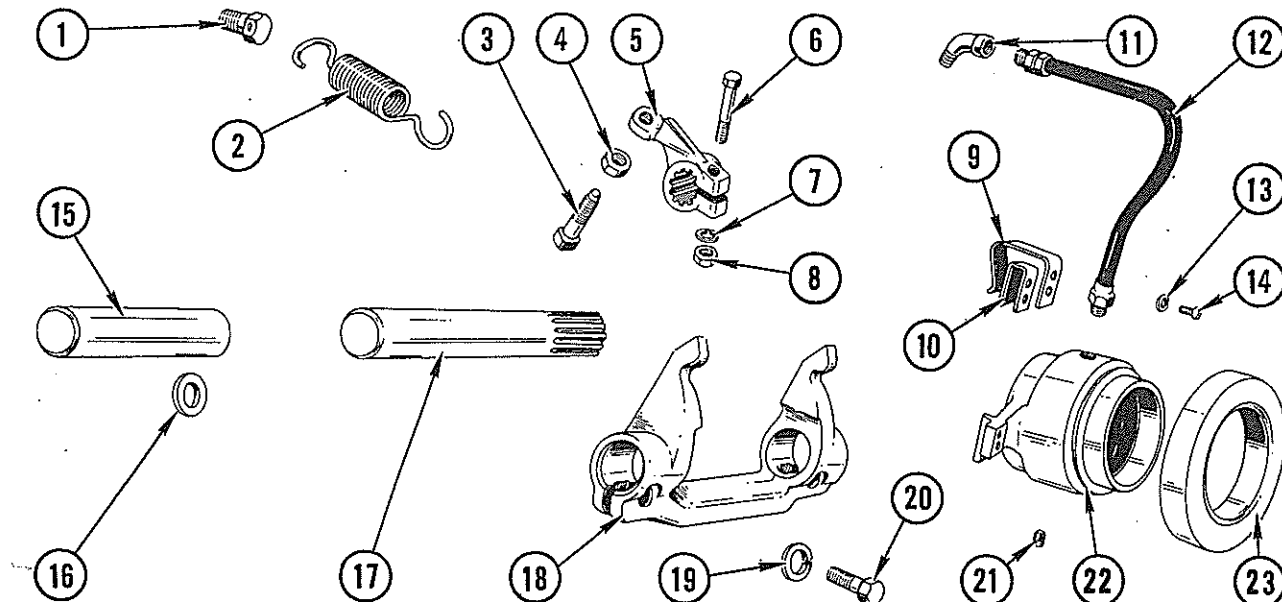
CLUTCH RELEASE MECHANISM
